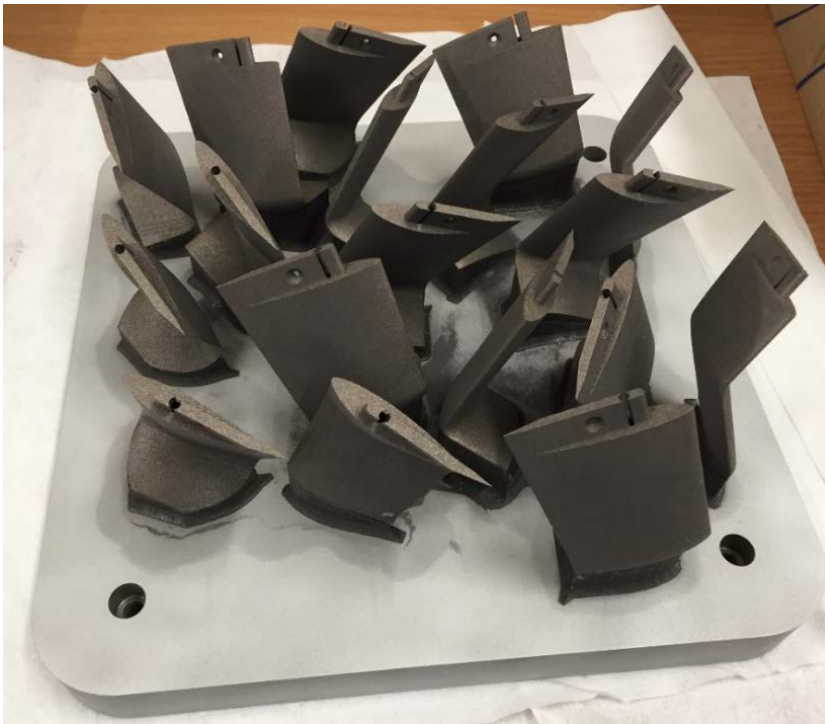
Several winglets 3D printed in aluminium on a 30x30-mm plate.
